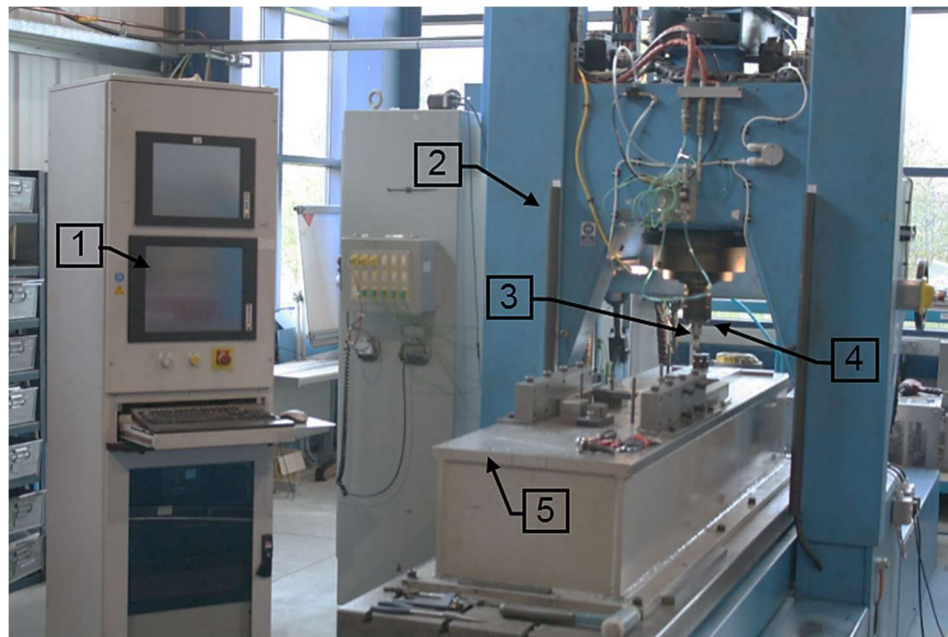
Image of the FSP apparatus; (1) control cabinet, (2) TTI FSP rig, (3) FSP tool, (4) rotating spindle, (5) mobile specimen bed
